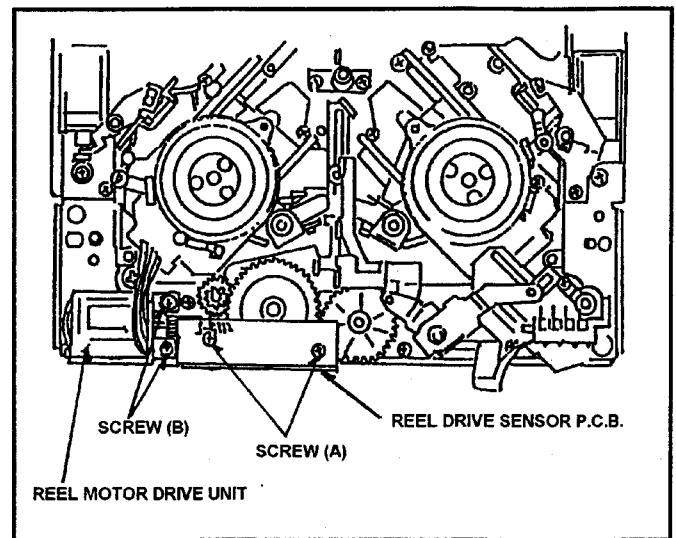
Removal of Reel Drive Motor Unit
